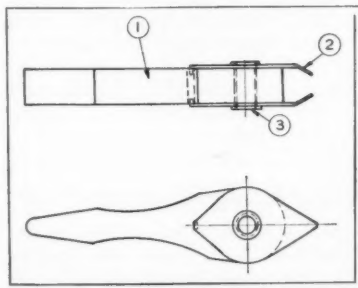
The parts assembled ready for use; both the bearing hole and that used for locating the pointer tags are moulded
